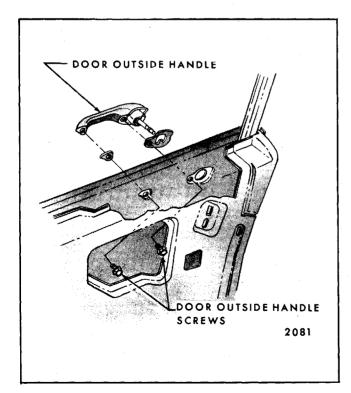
Outside Handle Removal (Push-Button Type)
